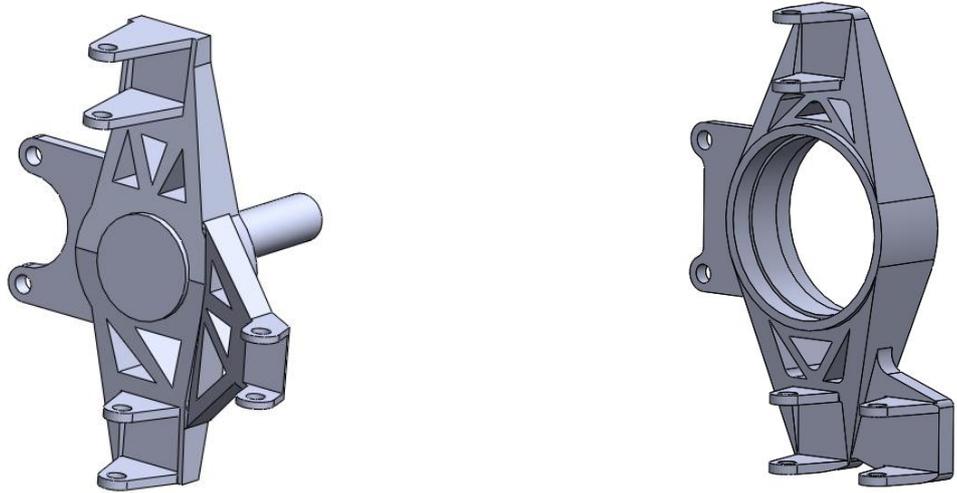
Images Showing CAD of Front & Rear Steering Knuckles
